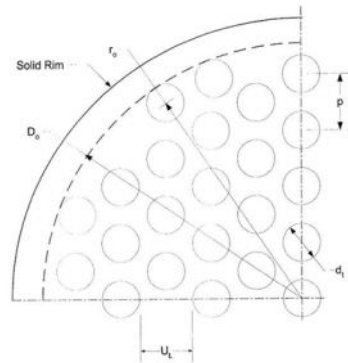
Pitch and nominal width of ligament at the minimum cross section in perforated flat plates
